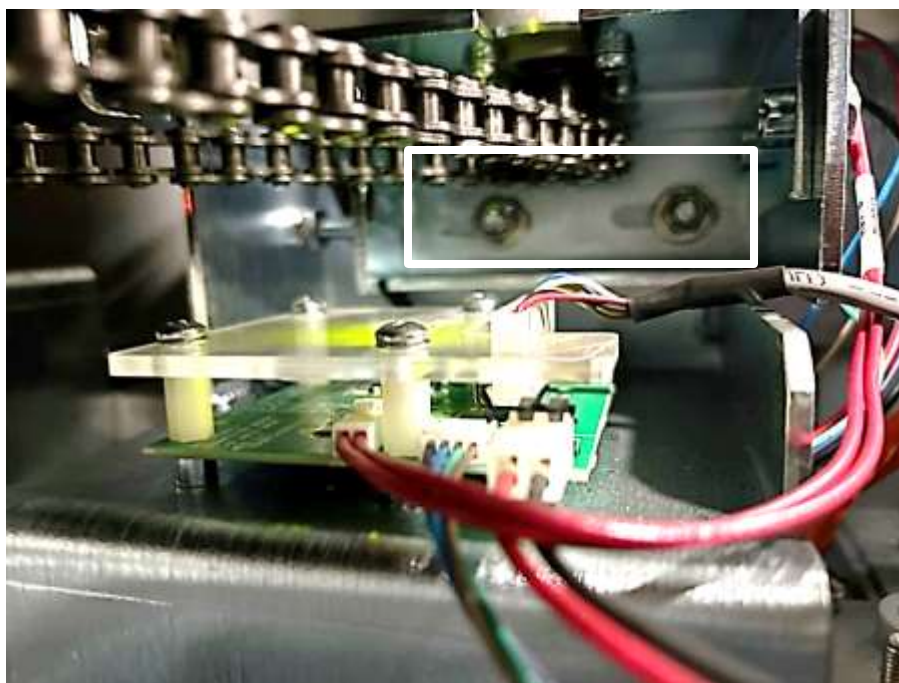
Main Carousel (Table) Chain Tensioning Bolts
